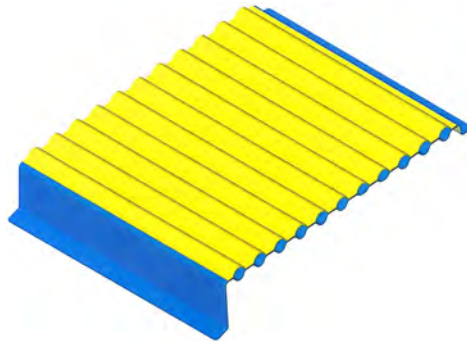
50.1 1111 Lower bulkhead assembly
